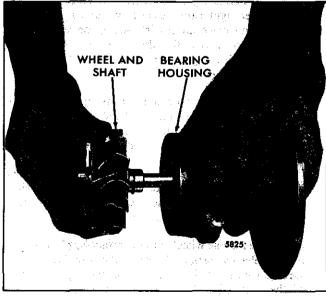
Installing Shaft and Wheel Assembly through Back Plate into Bearing Housing
